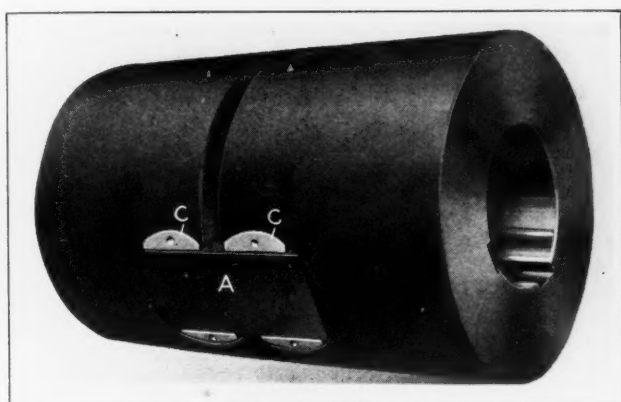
Double Universal Joint adapted for Straight-line Drives
